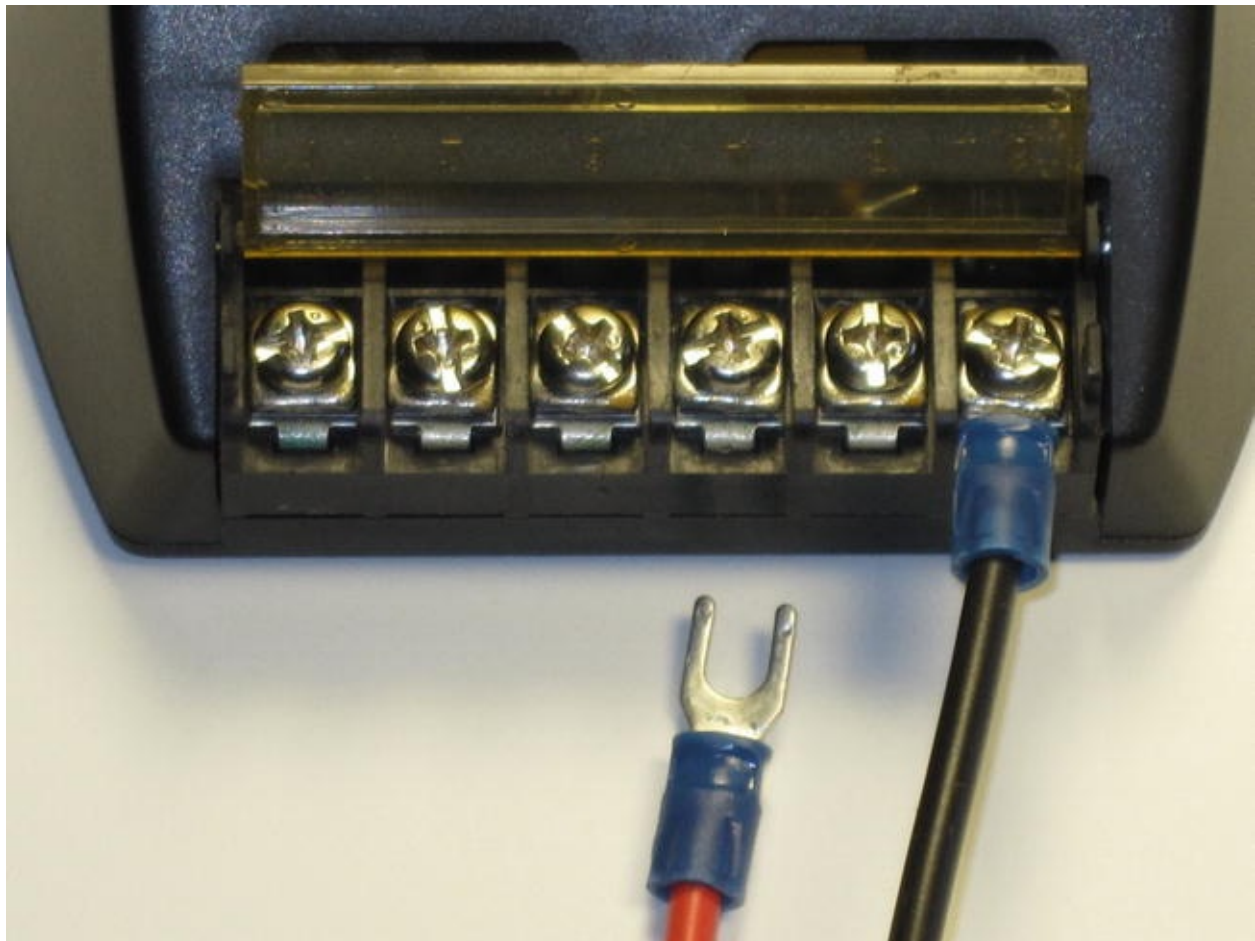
A barrier strip on a low-cost solar-charge controller. No soldering required! The specialized connector is held in place with a screw. The connector is affixed to the end of the wire by deformation using a specially designed crimping tool. You can see the indentations in the insulating collar around the connector.
